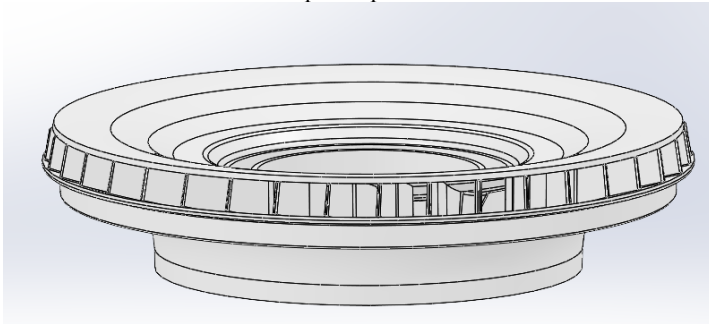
Model of the centrifugal fan impeller with backward-curved blades and a closed impeller
